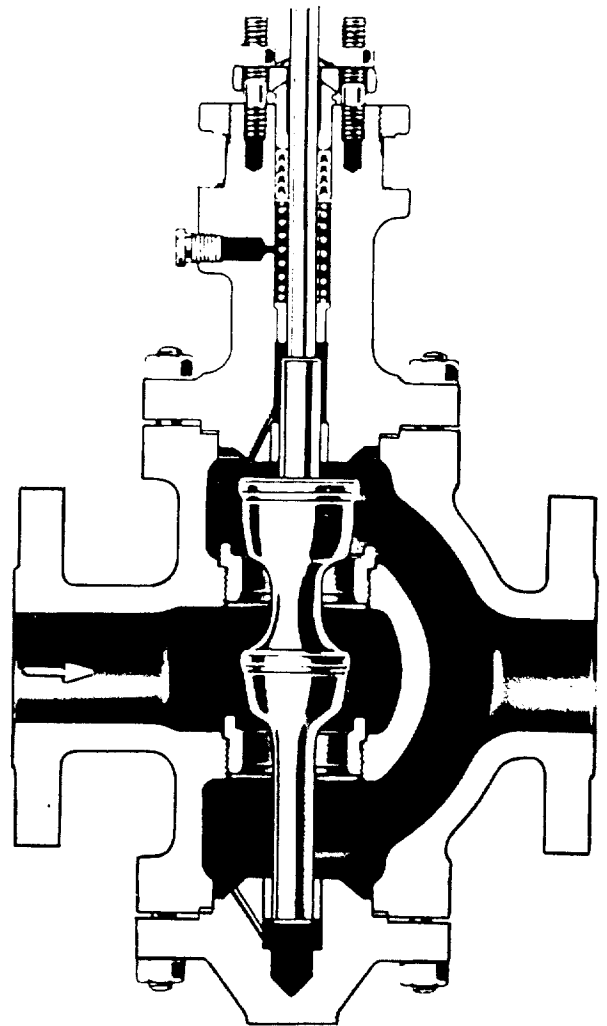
Globe Body Valve, Top and Bottom Guided
